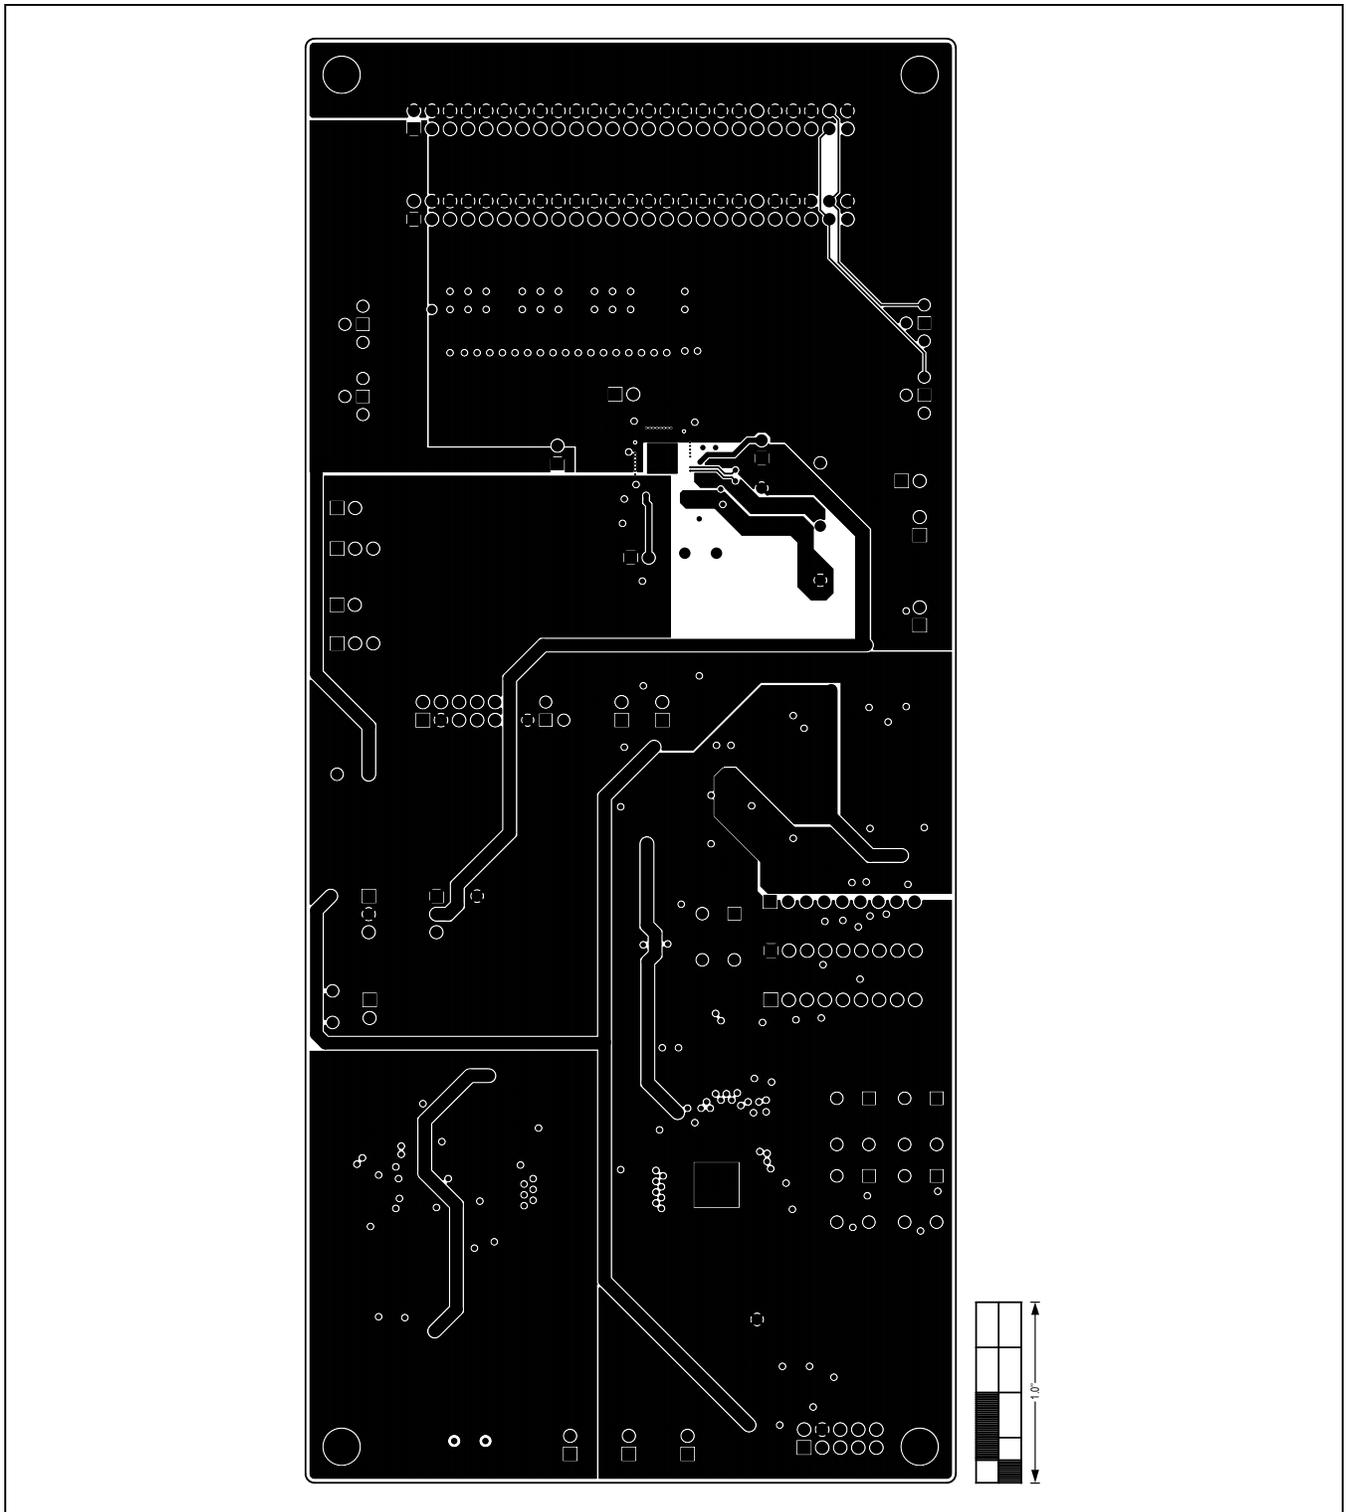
MAX11300 EV Kit PCB Layout—Power Layer 3
